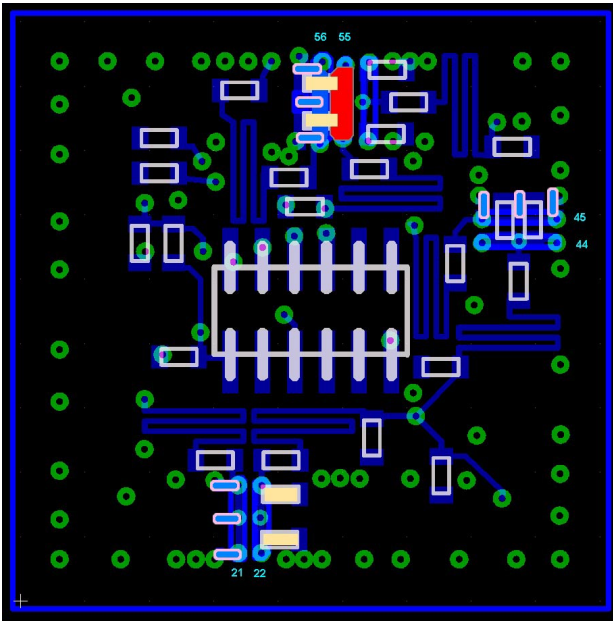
Pin preparation on bottom side of EMS testboard to define EFT signal injection path (Bypass caps, SMD ferrite filters, solder jumpers)
